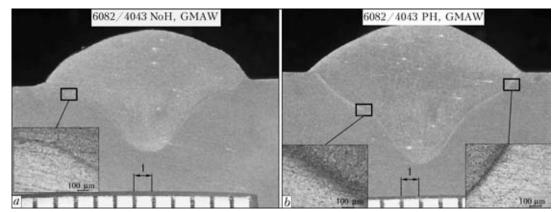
Macro- and microsections of the 6082 alloy joints GMA-welded using 4043 filler without (a) and with (b) preheating at heat input of 440 J/mm
